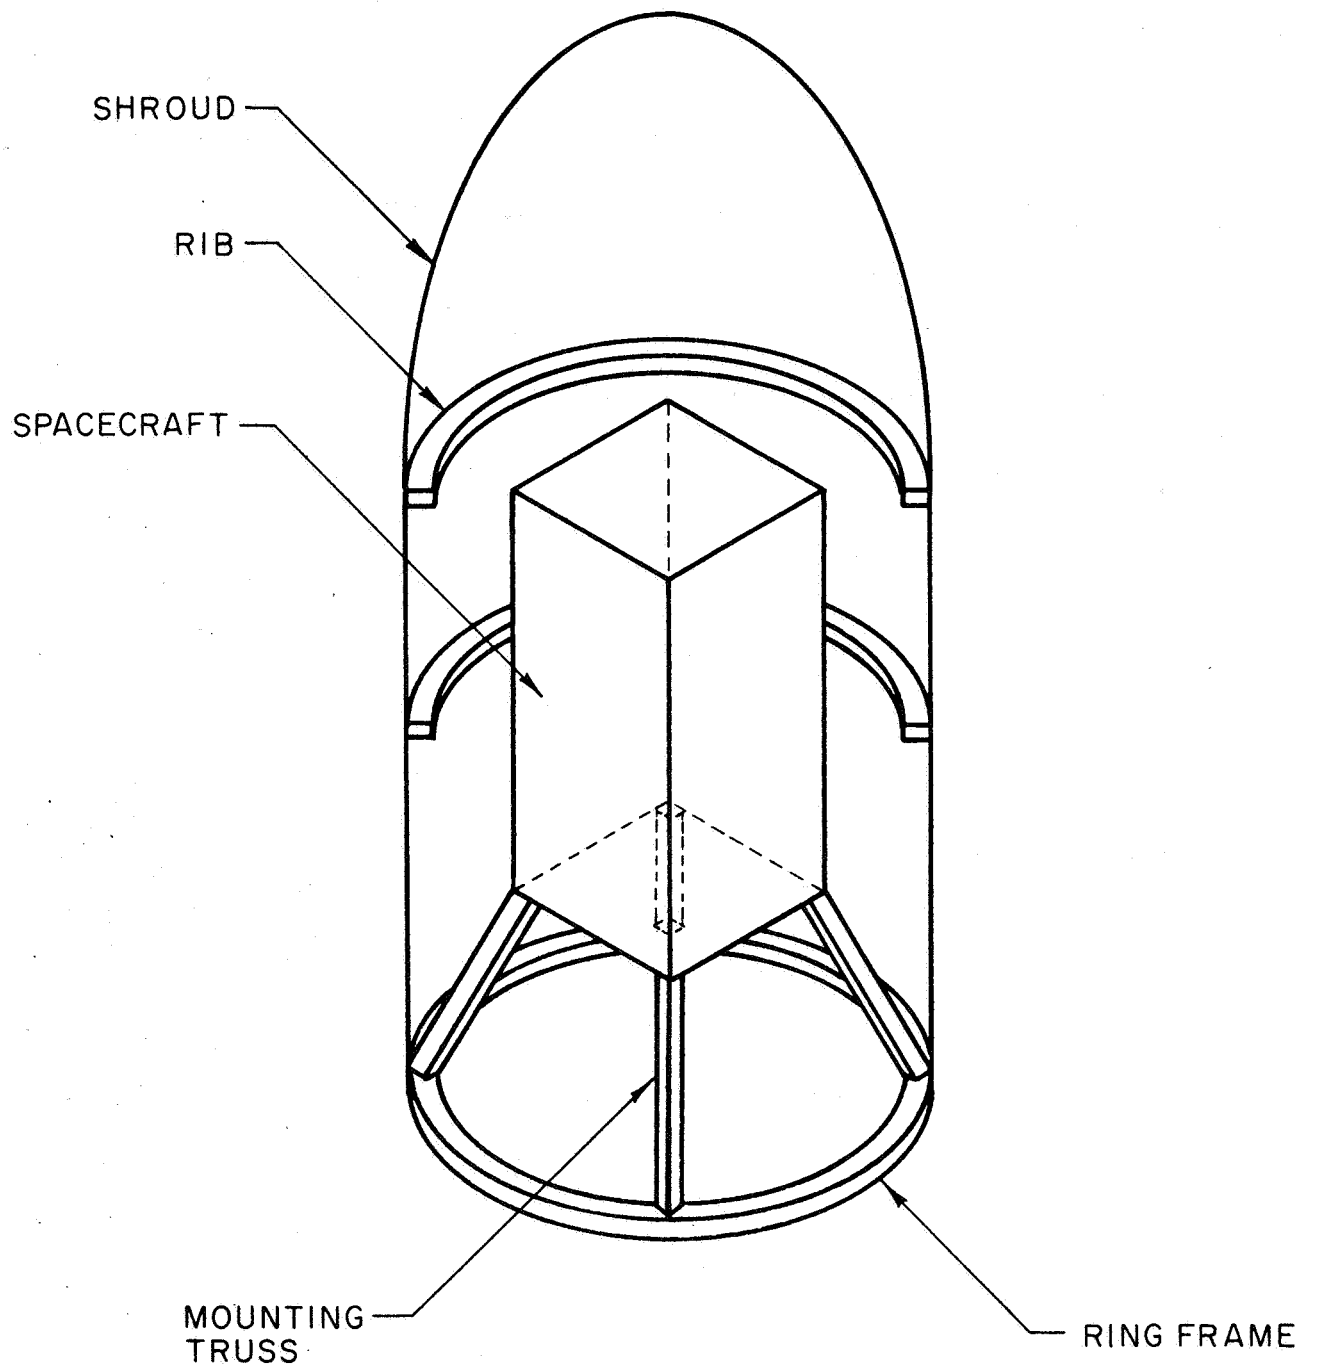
TYPICAL SPACECRAFT-SHROUD ASSEMBLY
